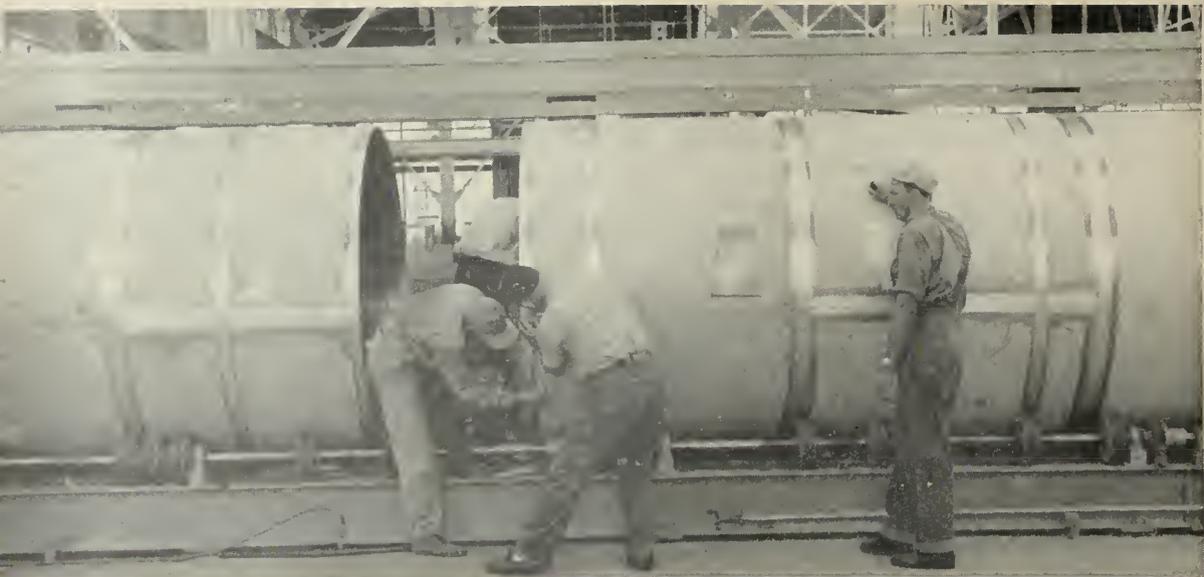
Workmen welding sections of the JUPITER-C. New techniques have contributed many diverse uses of both old and new metals.
